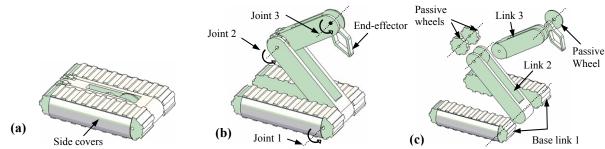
(a) closed configuration; (b) open configuration; (c) exploded view.
